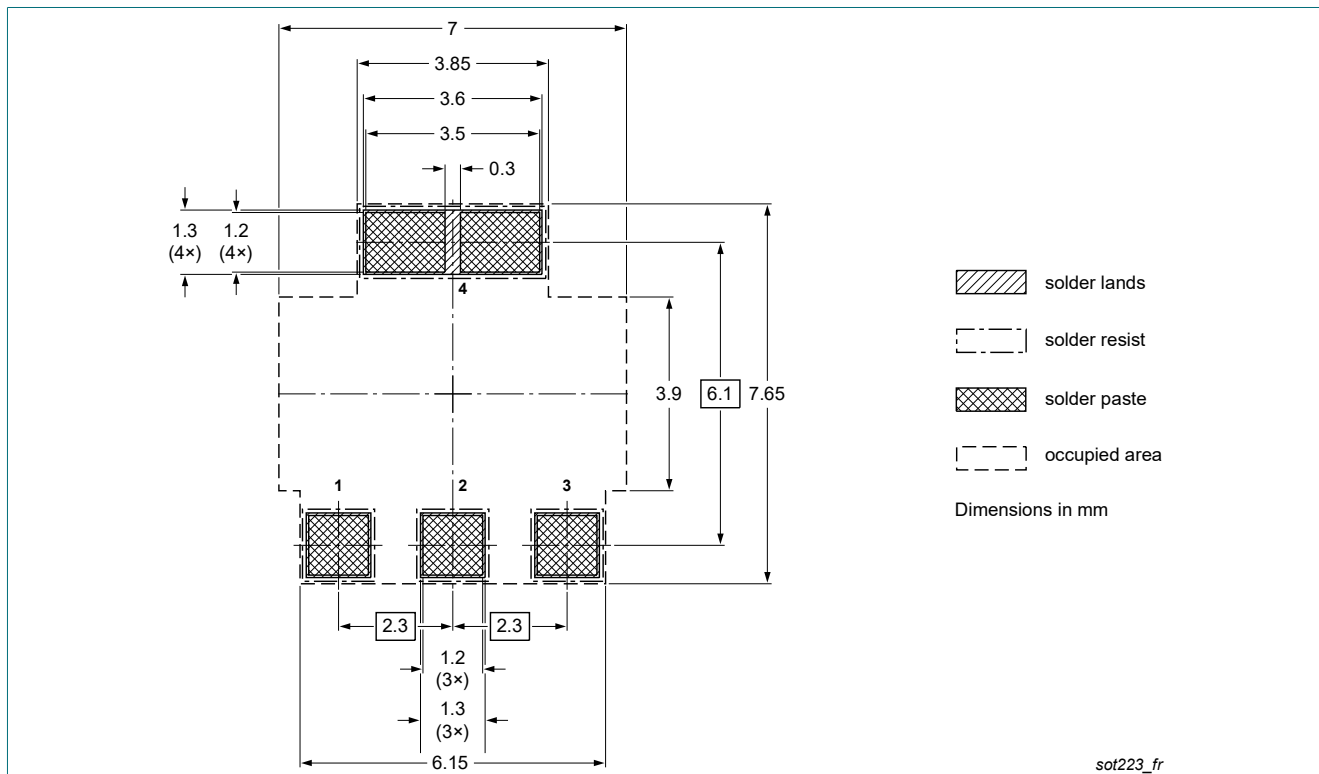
Reflow soldering footprint for SC-73 (SOT223)
